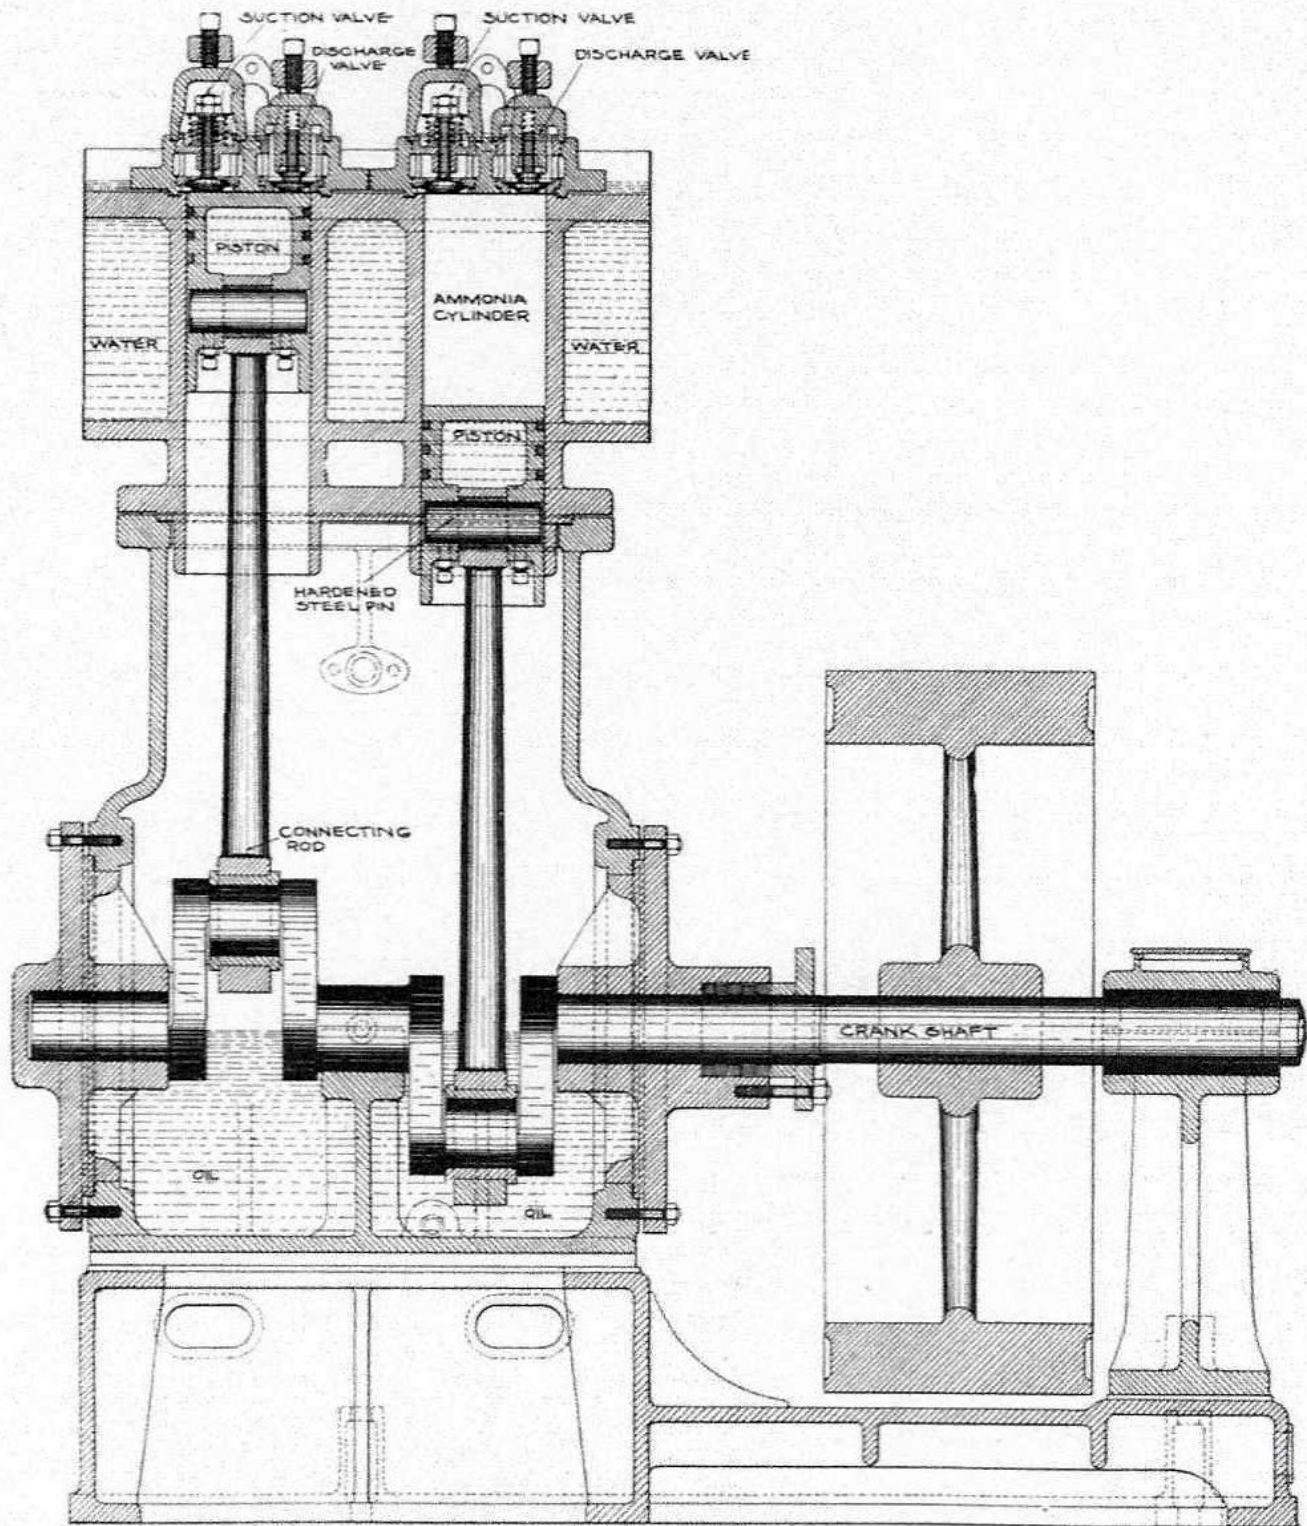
SECTION OF REMINGTON MACHINE,
